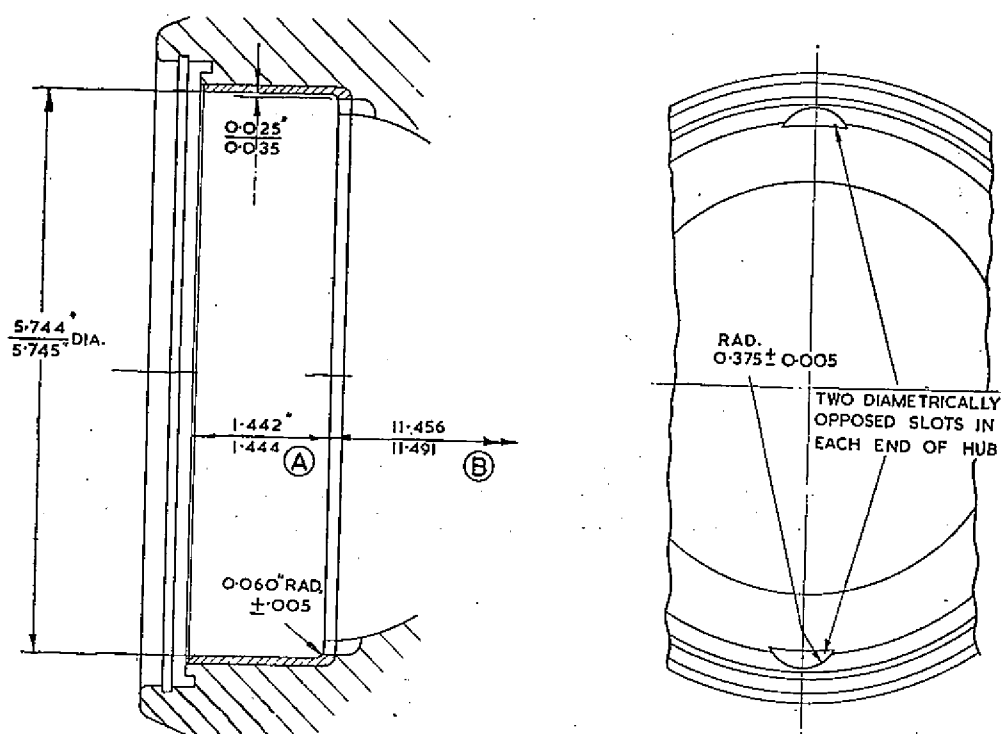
Dimensions for machining fitted liner. RP.5/4
